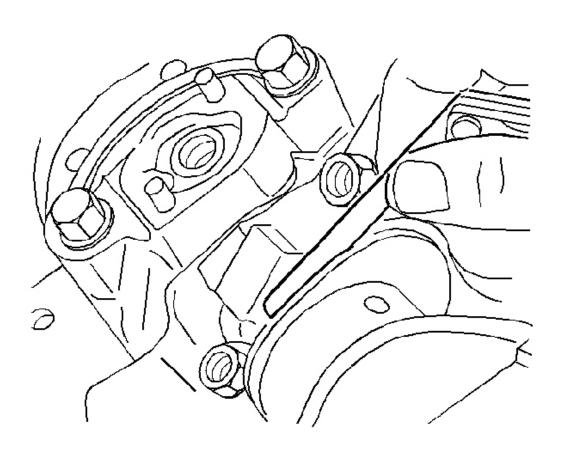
Measuring Connecting Side Clearance Courtesy of GENERAL MOTORS CORP.
